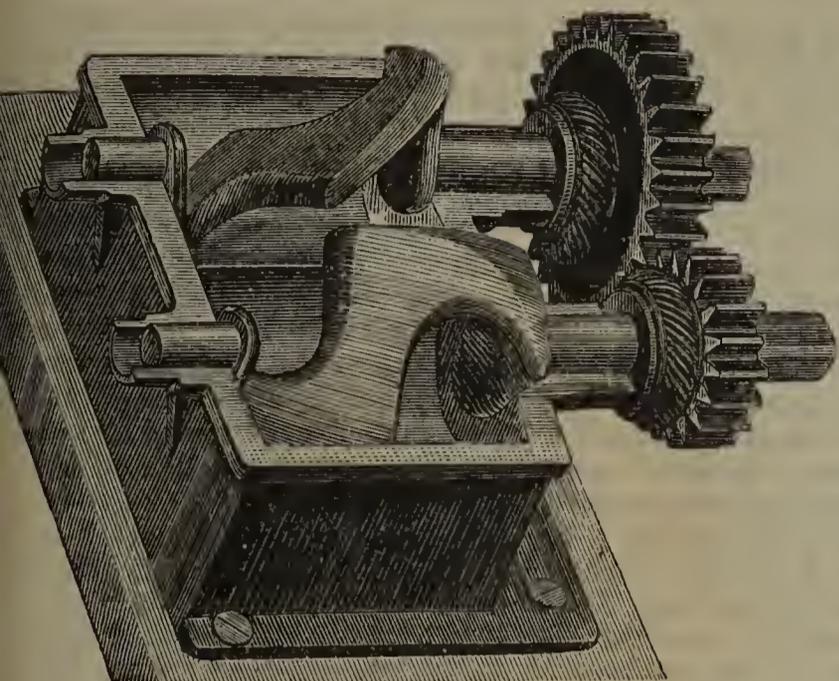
Pfeiderer's Patent Mixing Machine.
